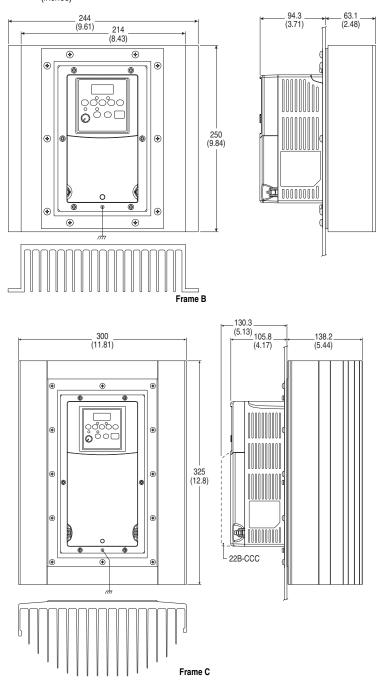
PowerFlex 40 Flange Mount Drives – Dimensions are in millimeters and (inches)
